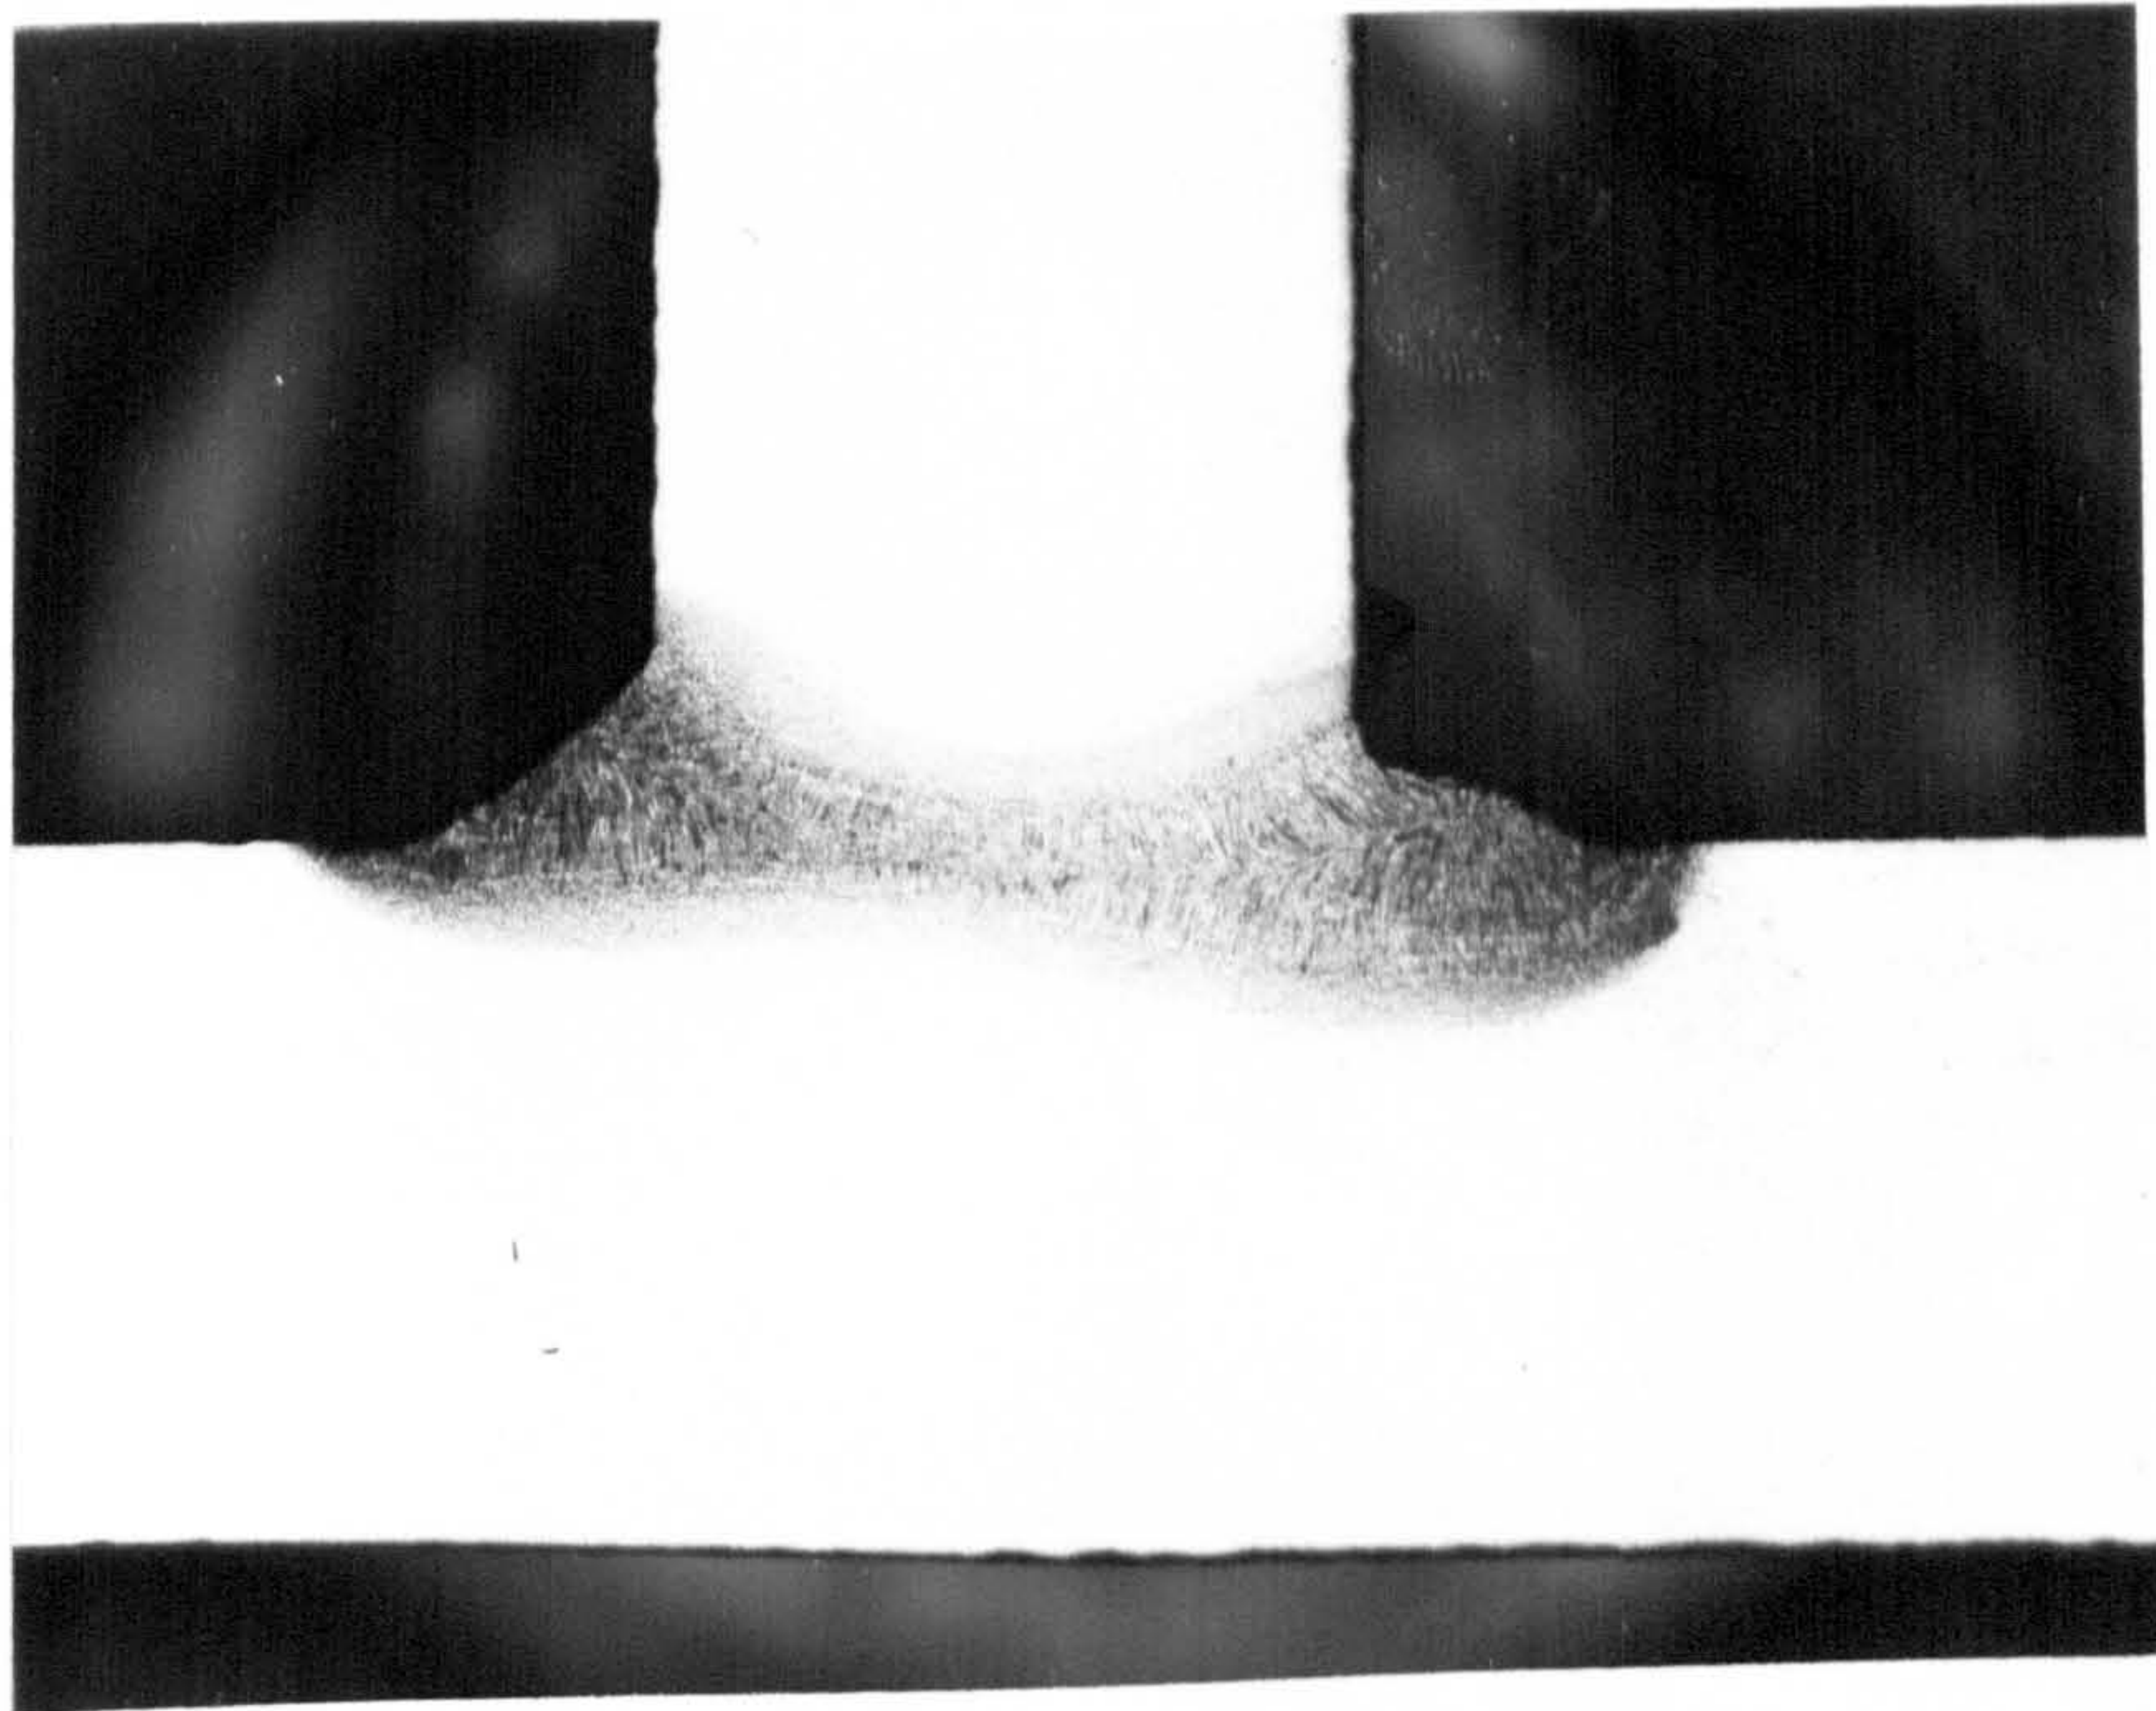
Macrophoto (x4.8) of a skid weld in 8mm thick plate (power = 9kW)
